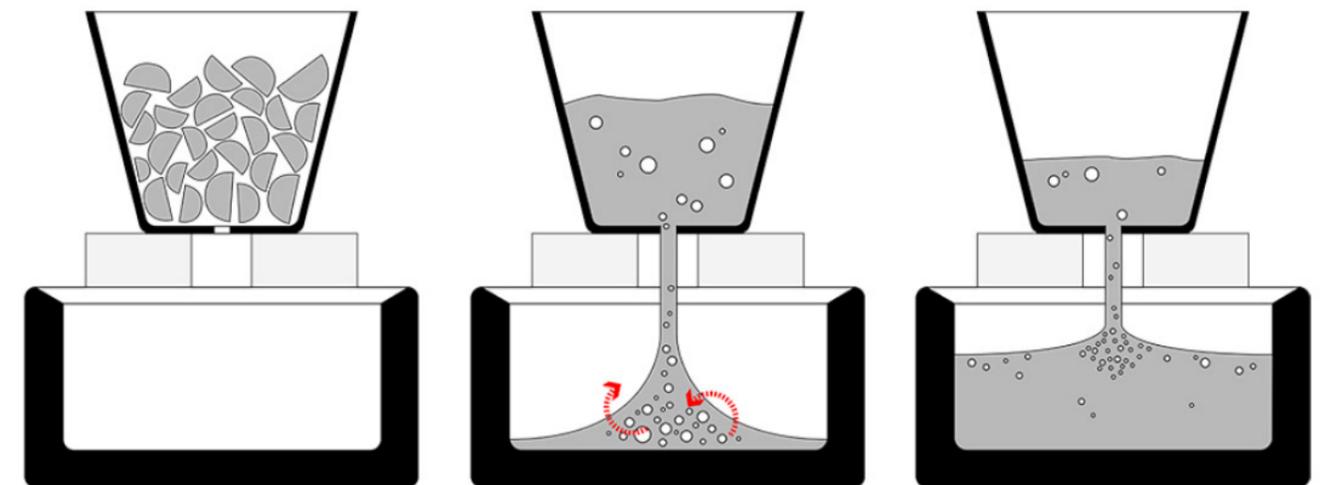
o: Process of Kiln Casting using terracotta pots for melting the broken glass pieces which pours down in the mould
